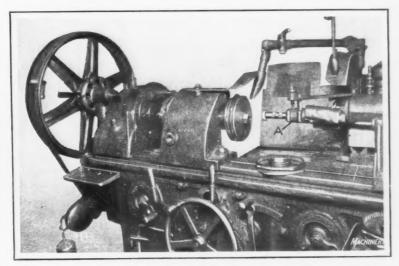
Cylindrical Grinding Machine Adapted for grinding the Periphery of Airplane
